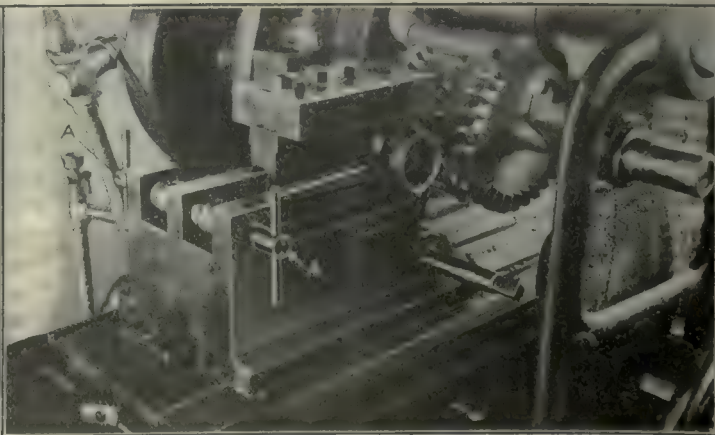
MILLING LARGE END OF CONNECTING-ROD
